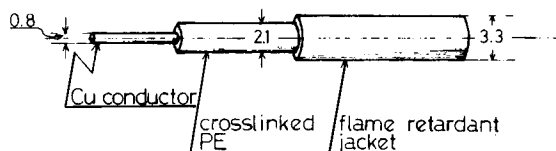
Structure and dimensions of wire specimen (in units of mm).
